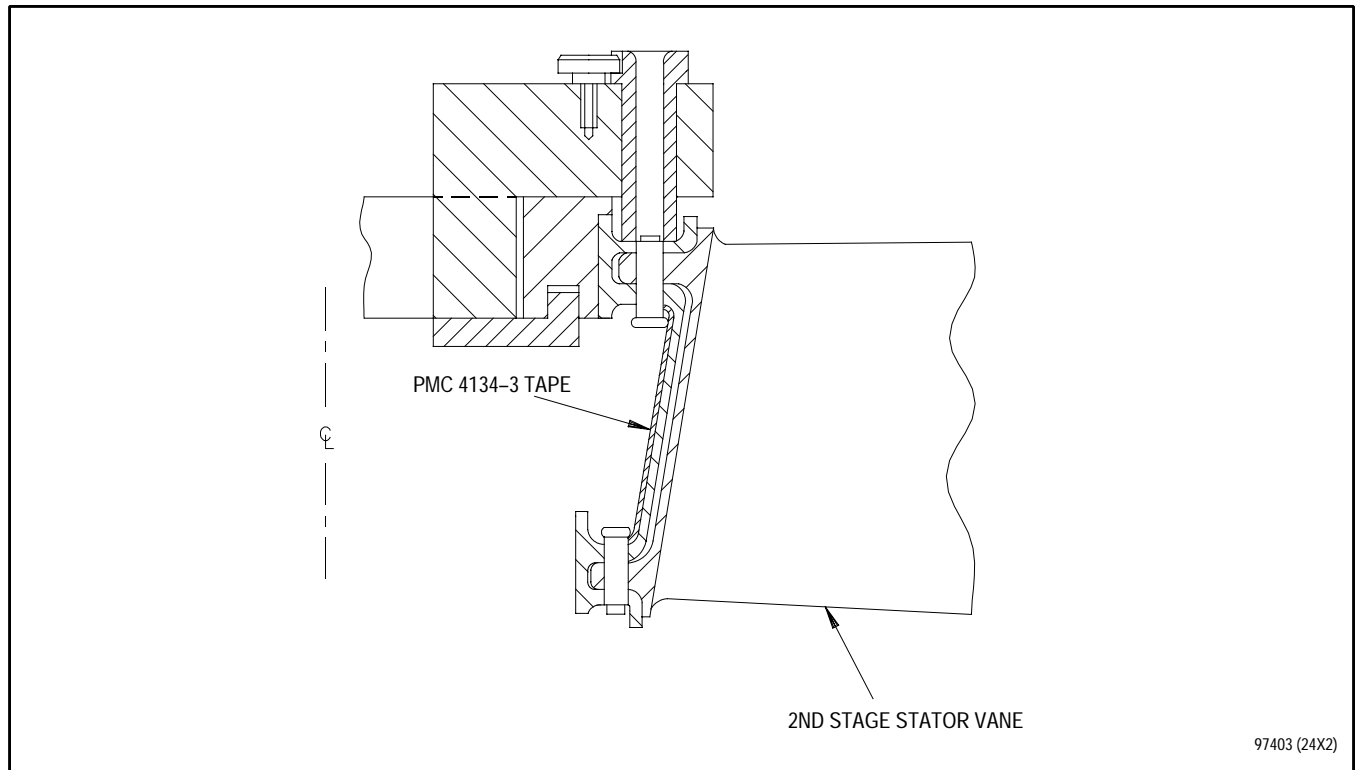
Second Stage Compressor Stator Assembly - Rear Retaining Pin Removal Using PWA 71276 Fixture
